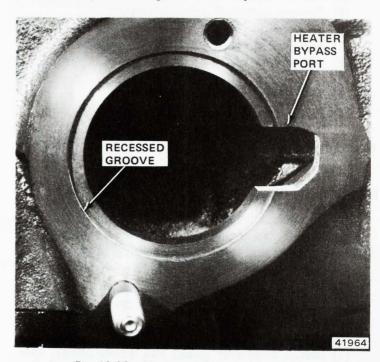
C-22 Thermostat Recess—Six-Cylinder
